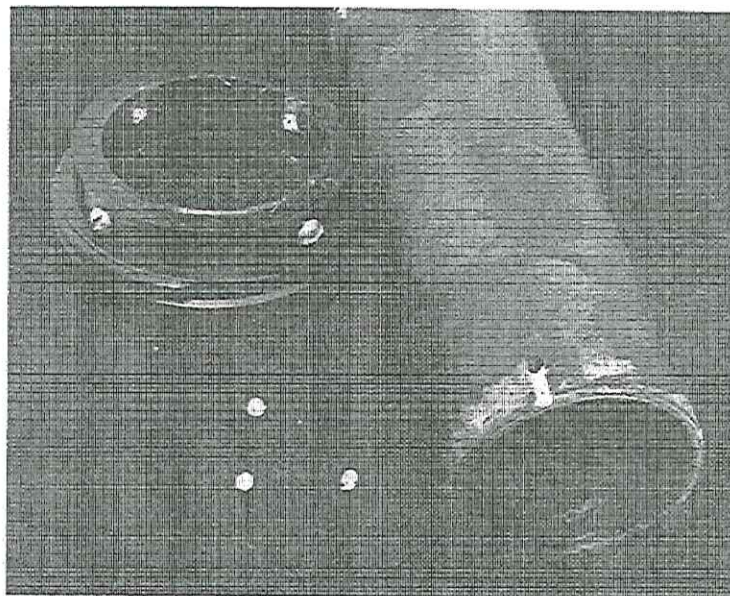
Photograph of Auto-Fill Tube after Mechanical Conversion Test
